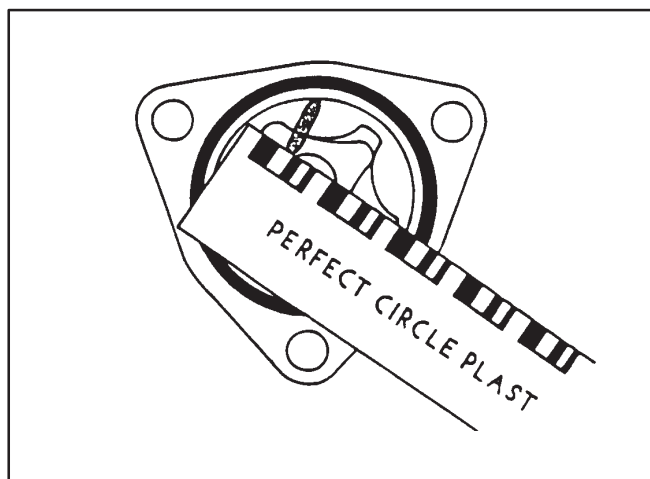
MEASURING PUMP ROTOR TO COVER CLEARANCE
